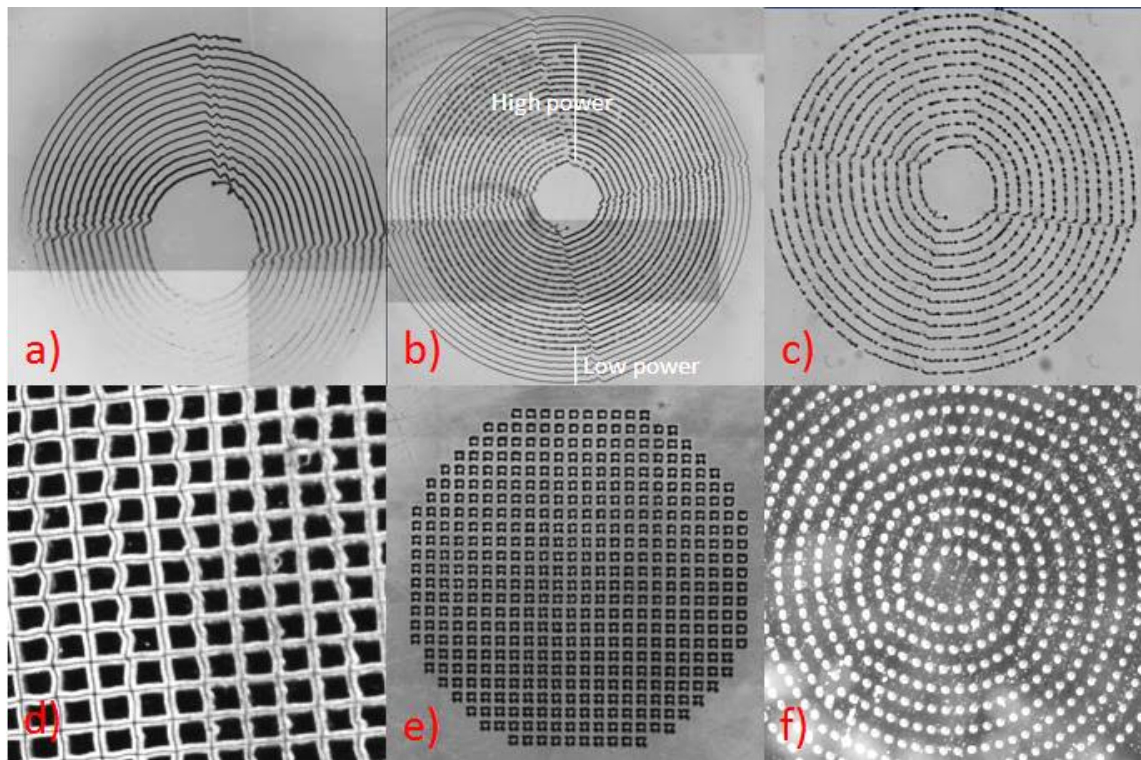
Different welding methods dealing with cracks. (a). Lower power, (b). Dual power welding, (c). Inward spiral, (d). Alternative weld geometry pattern, (e), (f). Discrete welding.
